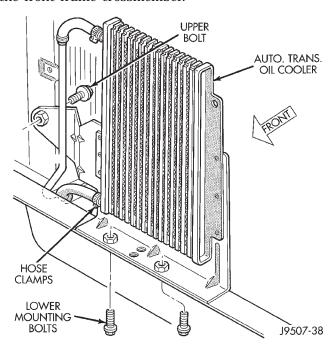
Auxiliary Air-To-Oil Cooler—YJ Models
